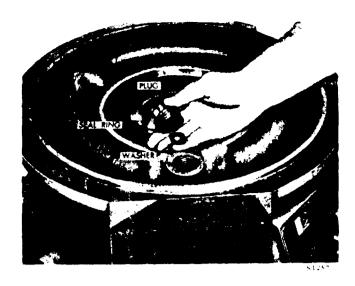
C-20. Removing (or Installing) Plug from Converter Housing
